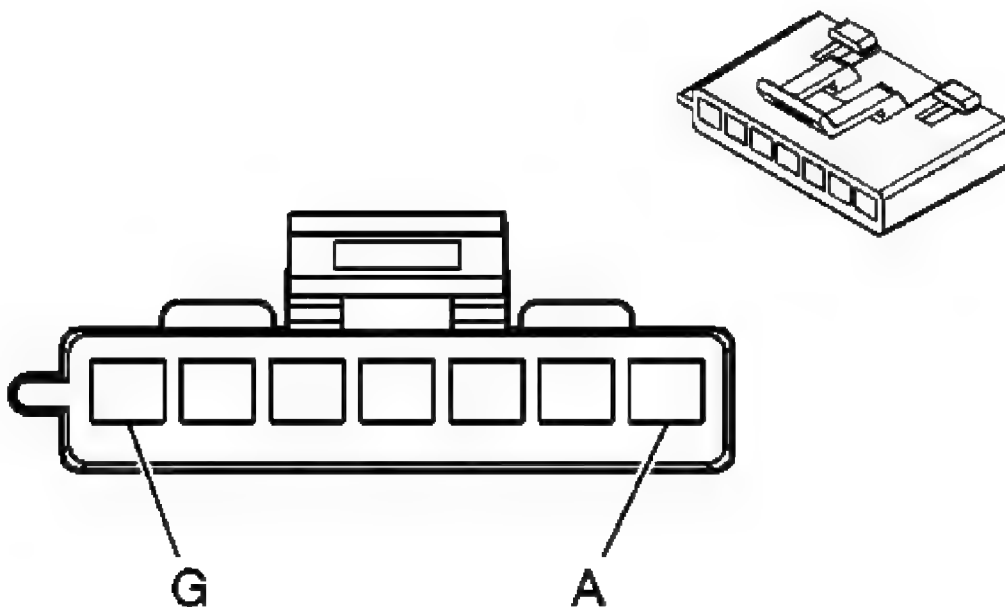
Driver Seat Lumbar Adjuster Switch (w/AE8/A45) Connector End View
